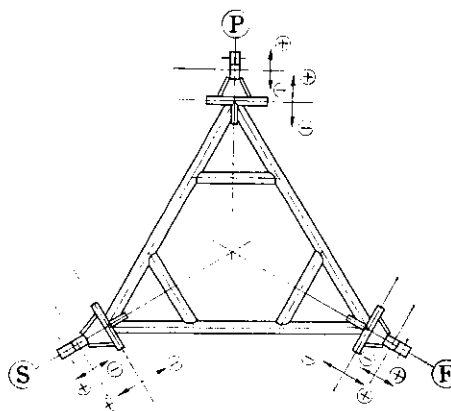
shows the leg assembling procedure. Two pieces of chords were set on the special assembling jig, and then the panel unit and diagonal brace were sequentially set on the jig. Manual welding was per-
